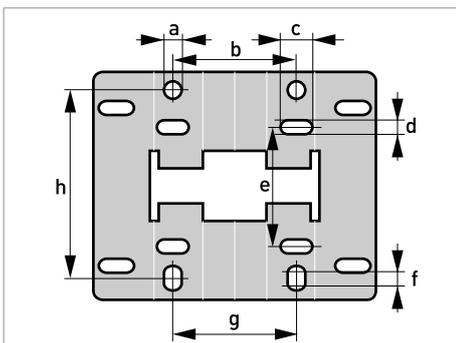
Dimensions of mounting plate of wall-mounted housing
